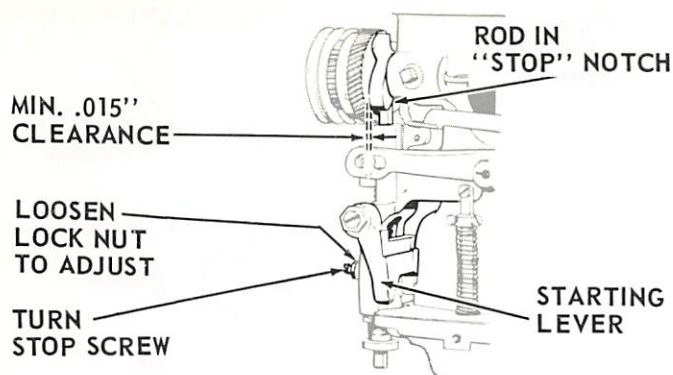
Clearance between Stop Cam Face and Interlocking Rod
